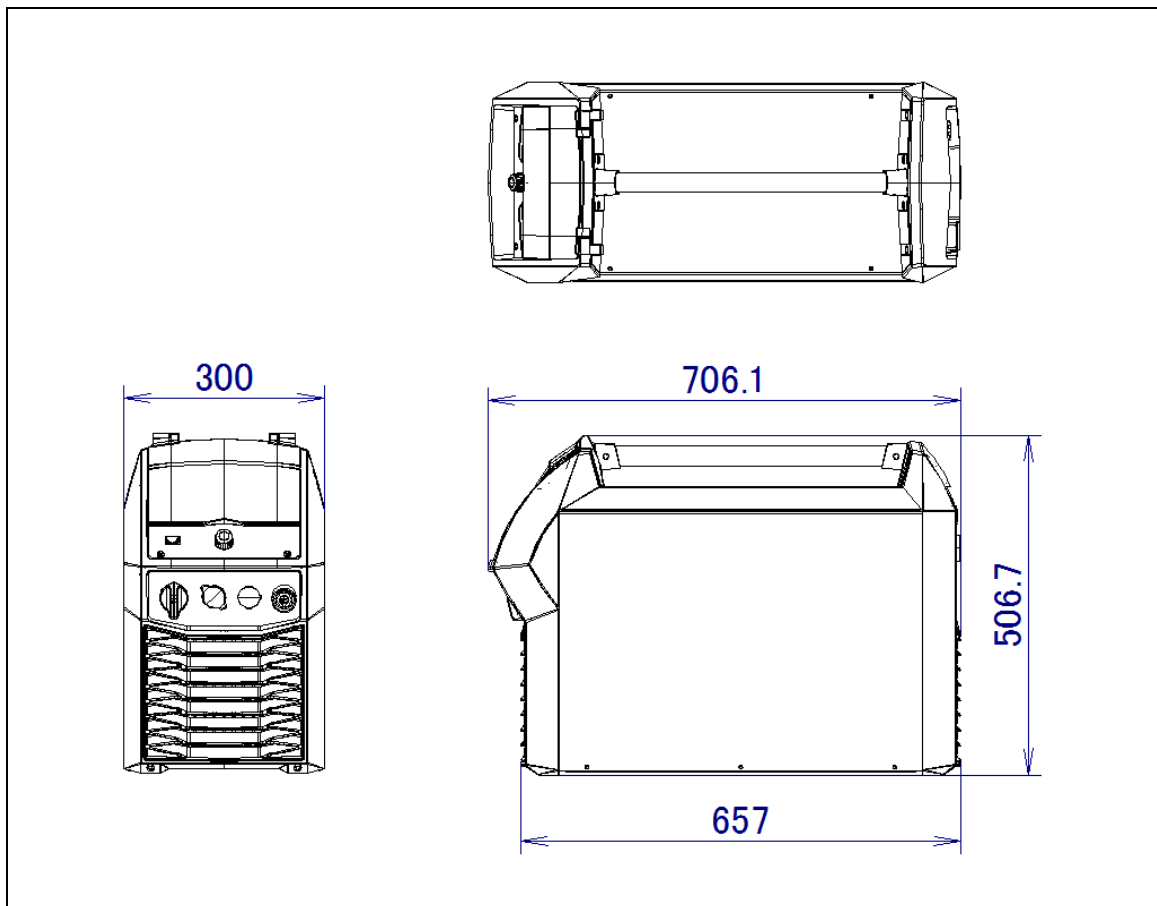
(a) External dimensions of the welding power supply
